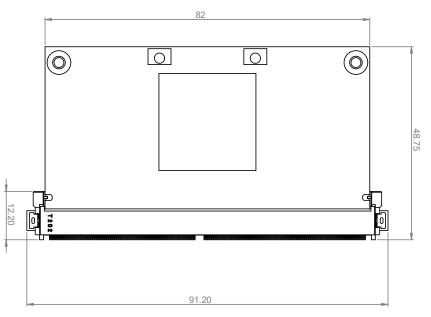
Minimum carrier board space requirement (dimensions in mm)
